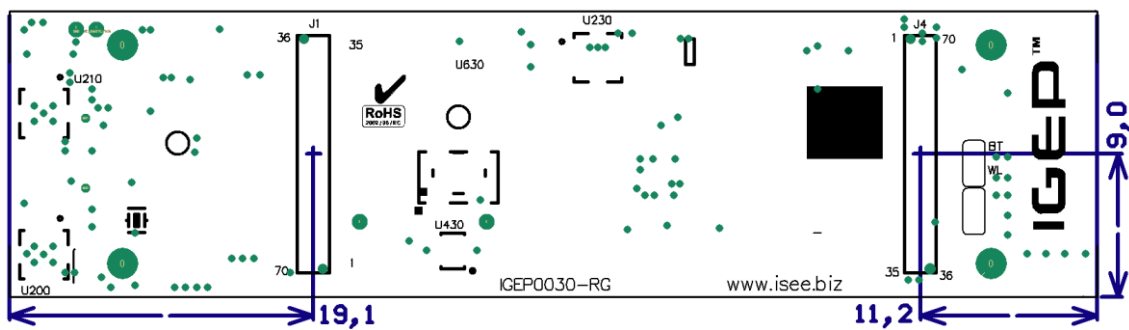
IGEP™ COM MODULE DM3730/AM3703 RG version Mechanical View BOT
